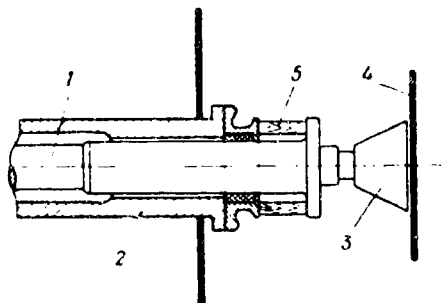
Diagram of Propeller Shaft's Installation: 1 - propeller shaft; 2 - stern tube; 3 - dum-craft; 4 - support; and 5 - wooden stays.
